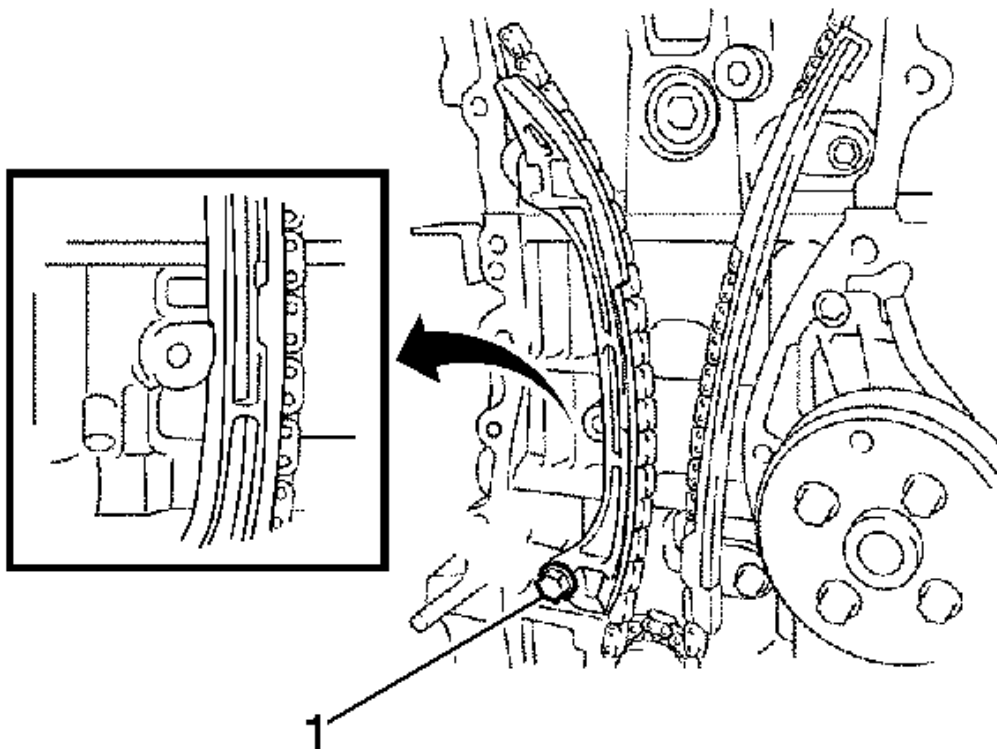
View Of Chain Tensioner Slipper & Bolt
